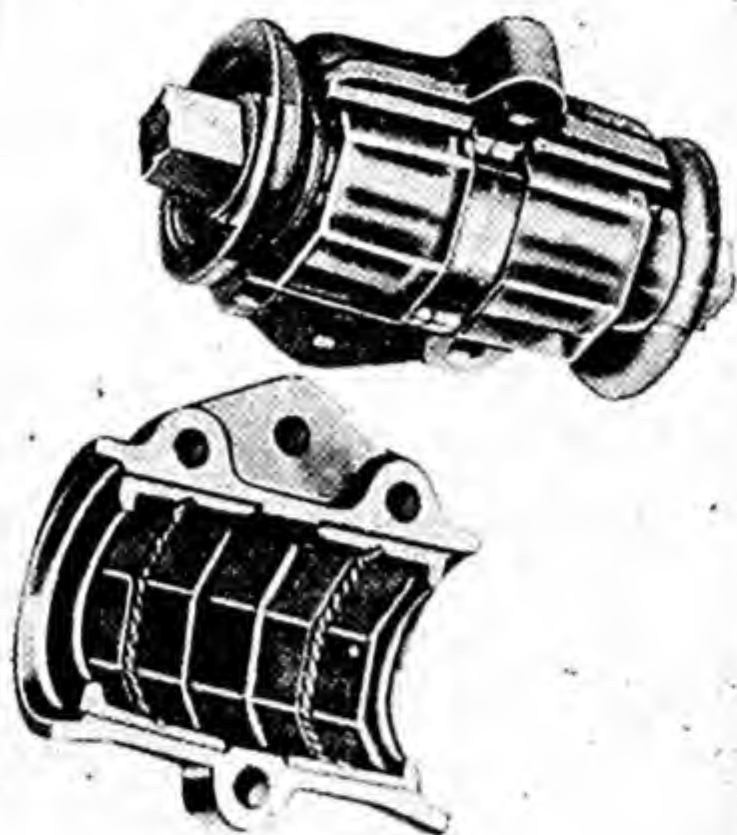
An adjustable chilled metal bearing for disk harrows.
